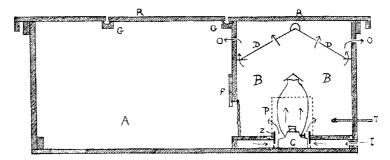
Vertical Section of Lamp Brooder. Length 6 ft.; breadth 2 ft. 1½ in.; height I ft. 11 in. front, 1 ft. 7 in. back. (R) Roof in sections, hinged behind, and covered with bituminous felt. (A) Outer chamber, (B) inner chamber, (C) hurricane lamp, (D) cone of iron sheeting, (I) fresh air inlets, (F) sliding trap door, (G) back to front roof supports with groove to carry off water, (O) foul air outlets, (P) perforated zinc collar, (Z) zinc collar.
